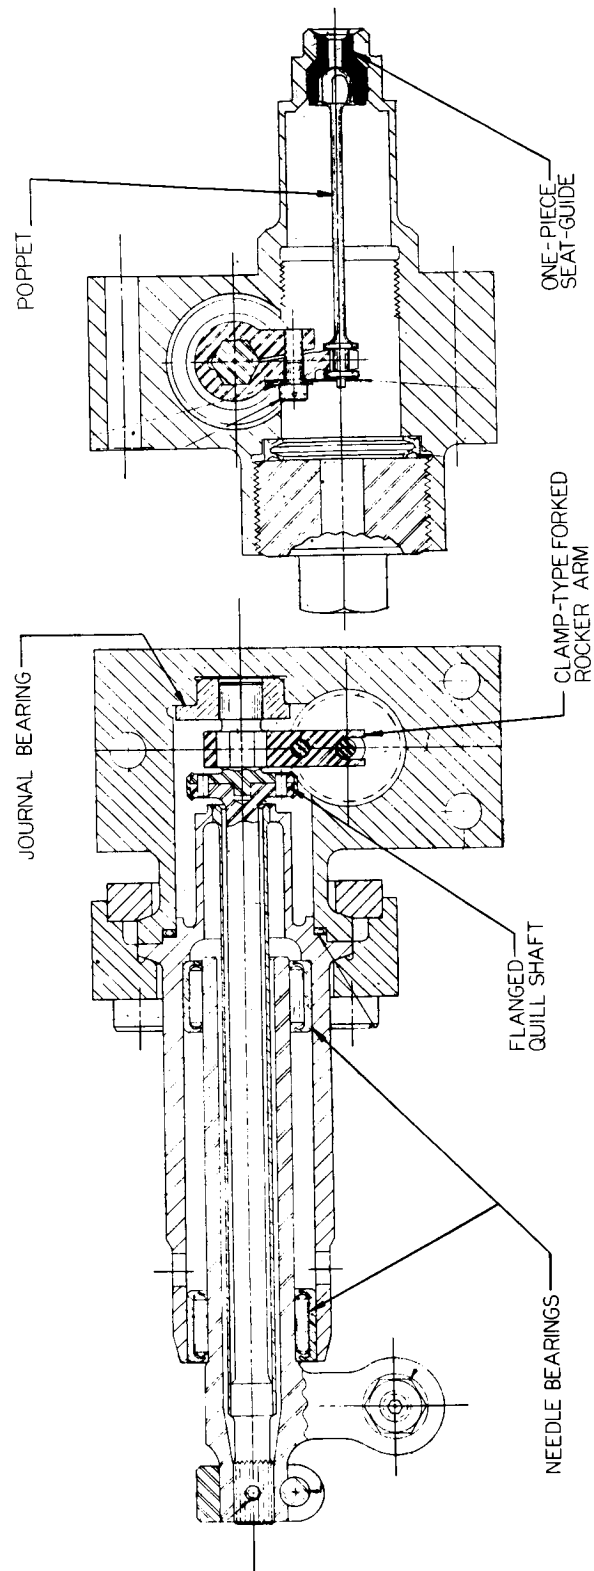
Section Views of Intermediate Oxygen Injector Assembly
